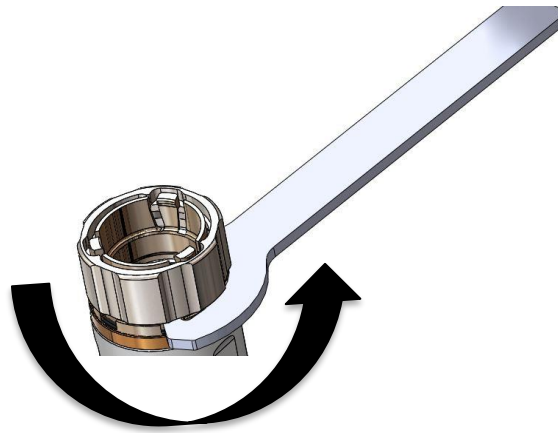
Turn spanner wrench to remove or replace QD insert with direct thread insert.
